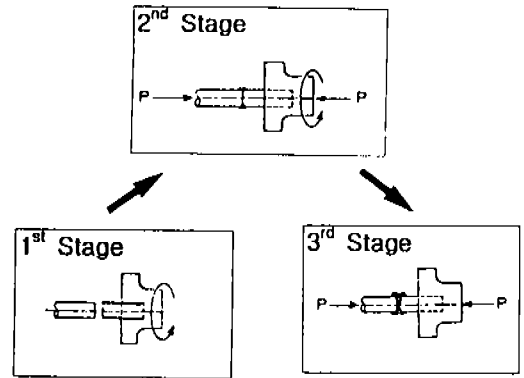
Stages in friction welding (Brake-Type).¹⁷⁾
